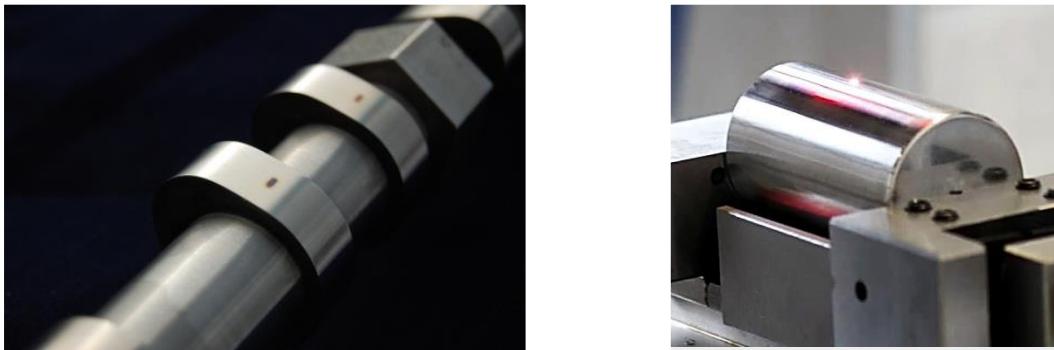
Laser generated defects; left image: crankshaft with artificial defects; right image: bearing while laser treatment
